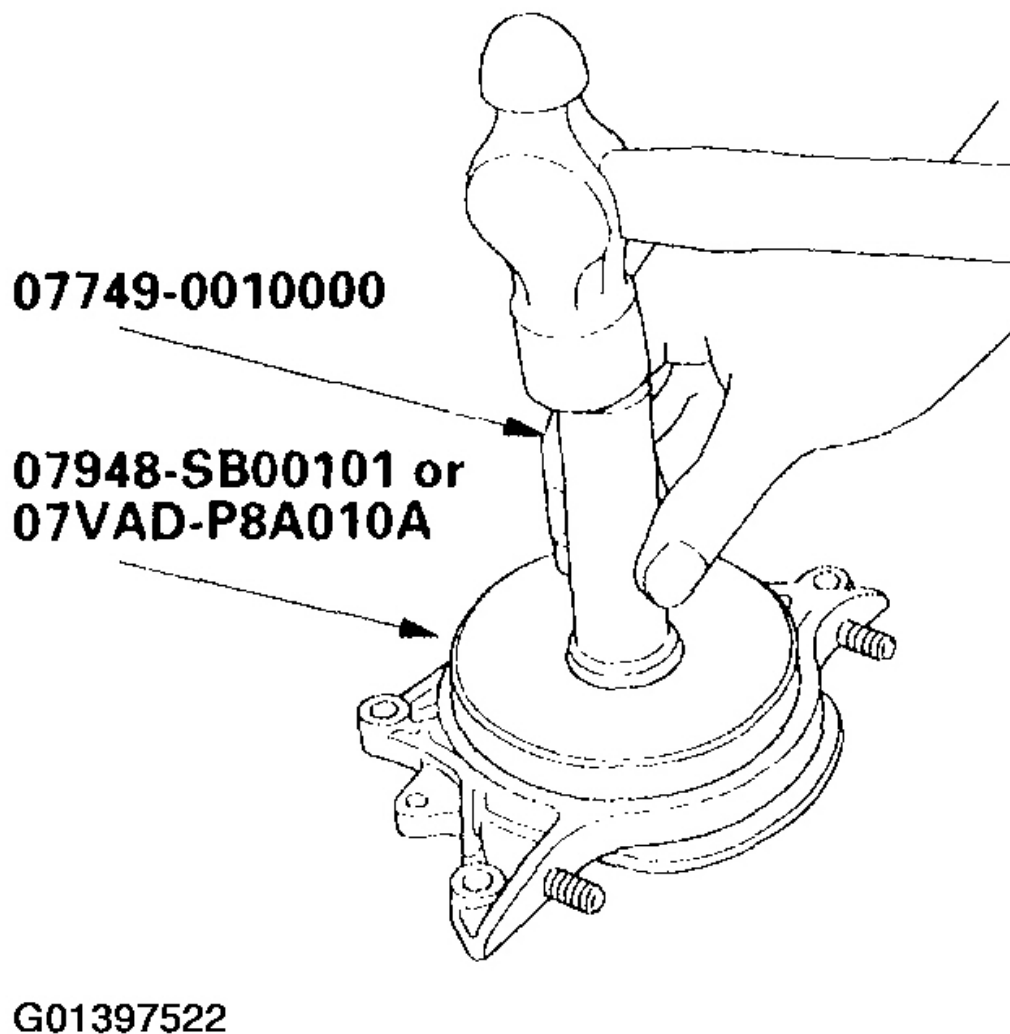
Driving Crankshaft Oil Seal Until Special Tool Bottoms On Engine Block
